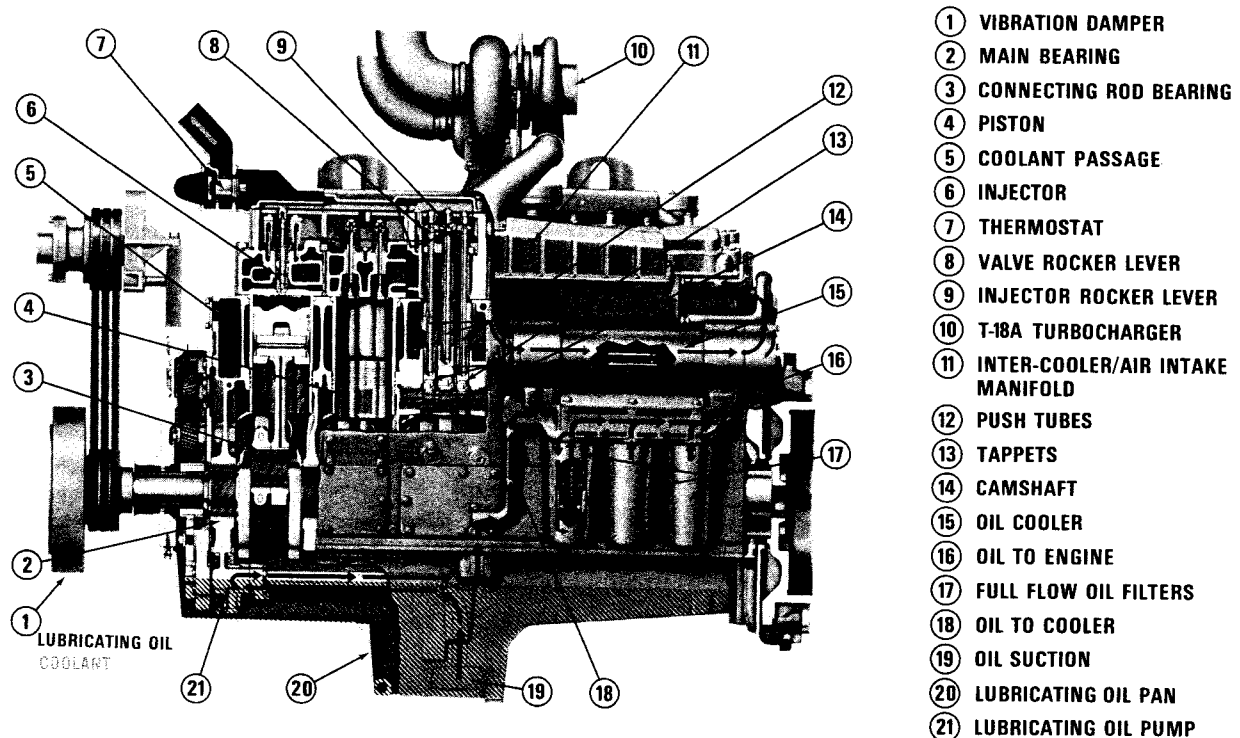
, (CWC-13). Lubricating oil and coolant flow — V-1710 Engine
